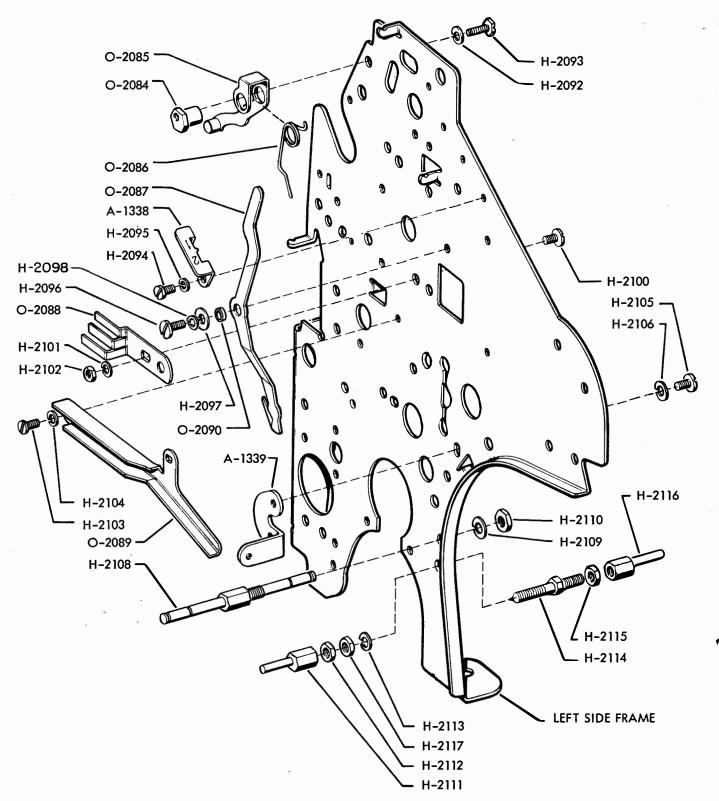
Automatic Typer, Left Side Frame Mechanism
